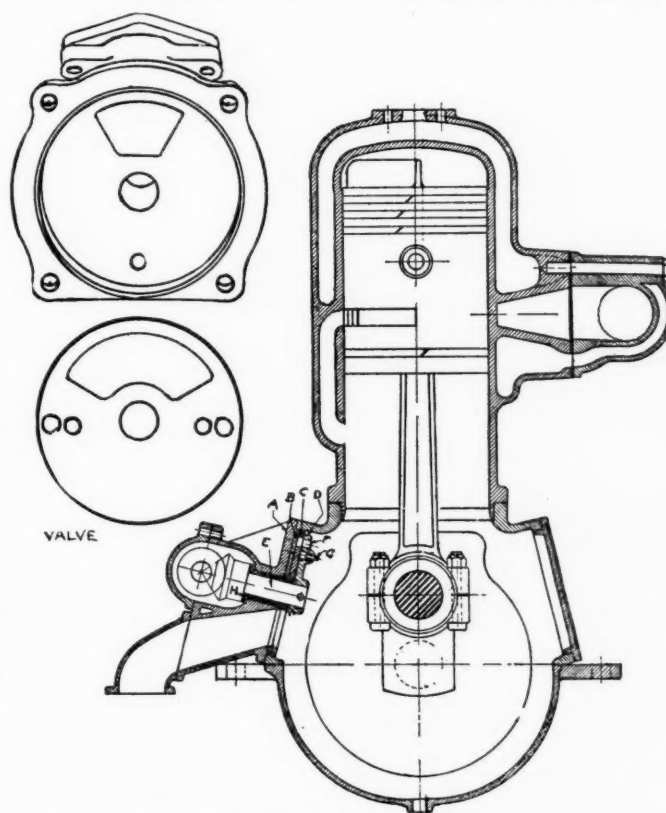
Two-cycle engine, with details showing the rotary disk valve and valve face
